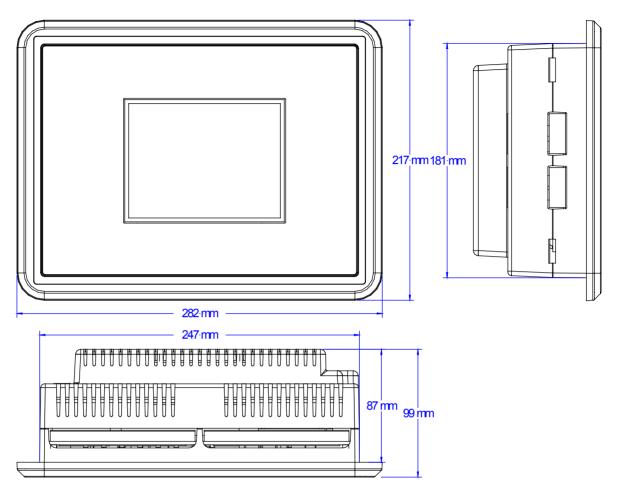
Plastic housing easYgen-3000 - dimensions
